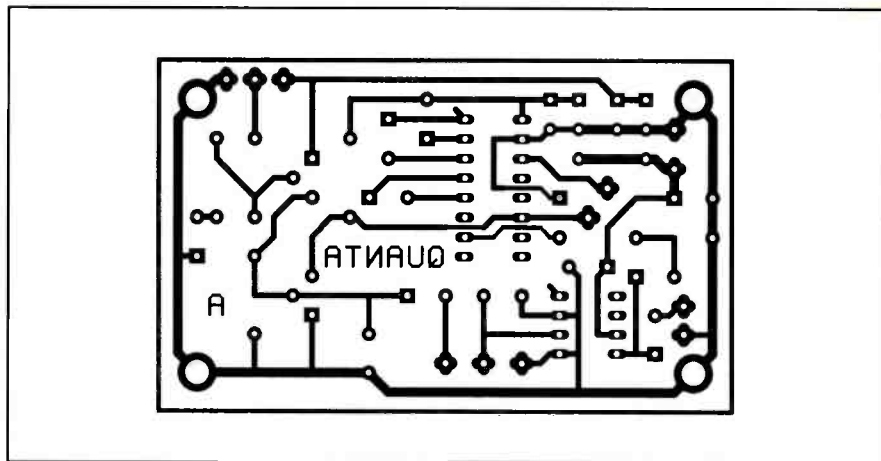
Actual-size etching-and-drilling guide for making project's printed-circuit board.
